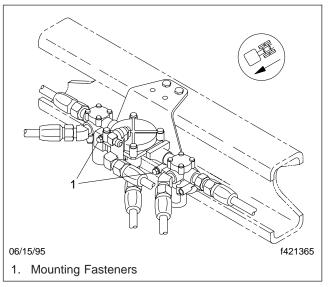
, Combination Solenoid Control Valve Mounting (rear axle mounting shown)
